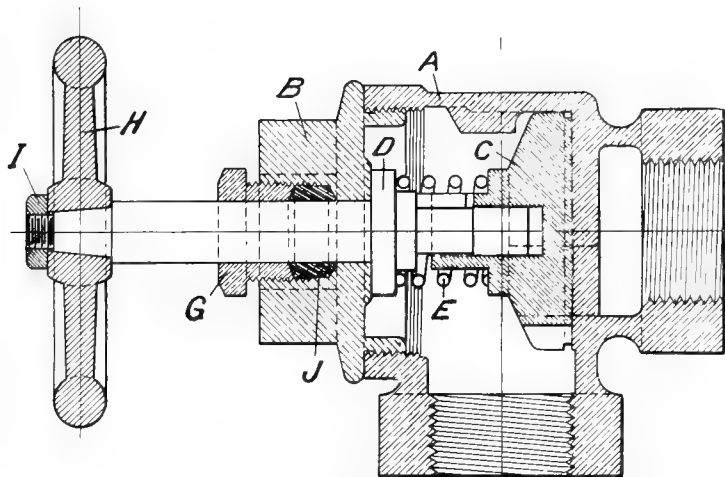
Section Through Valve Shown in Fig. 2139.
